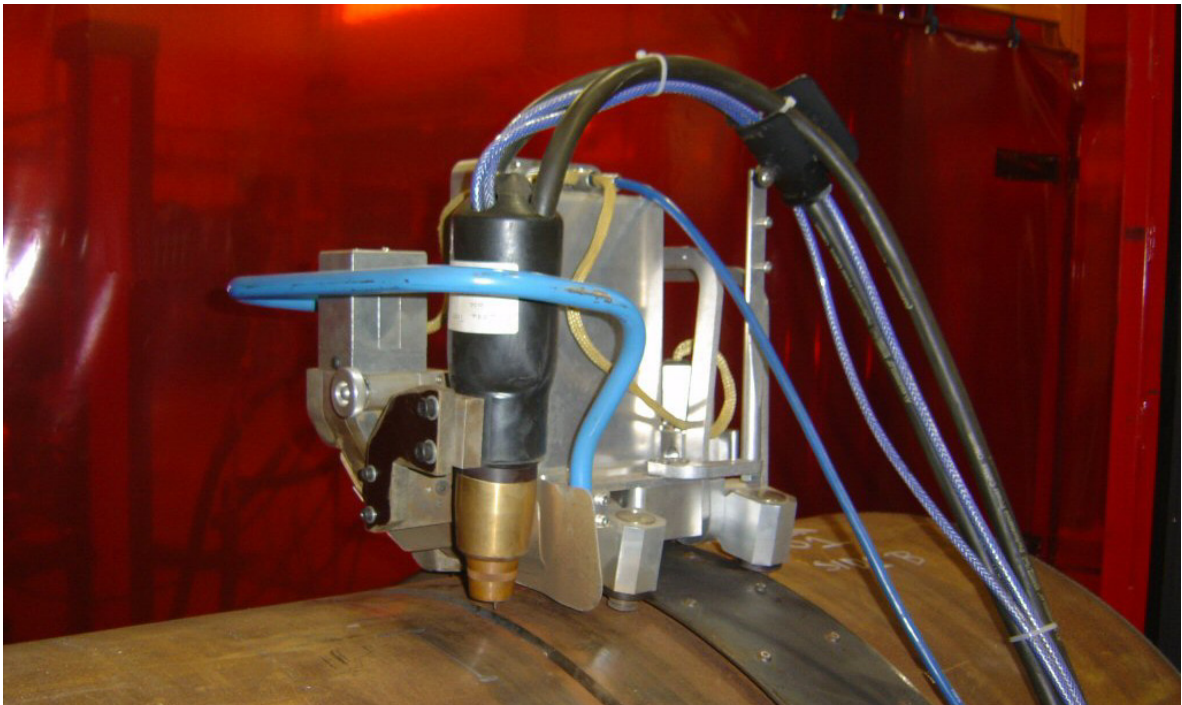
RMS MOW II single torch pipeline welding head on pipe
